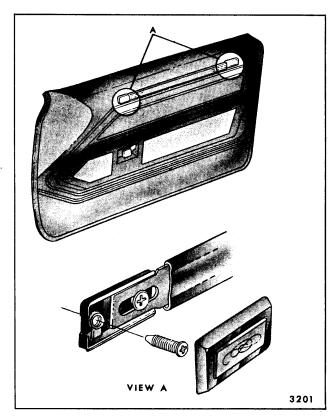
Door Pull Handle Attachment - Cadillac Styles
